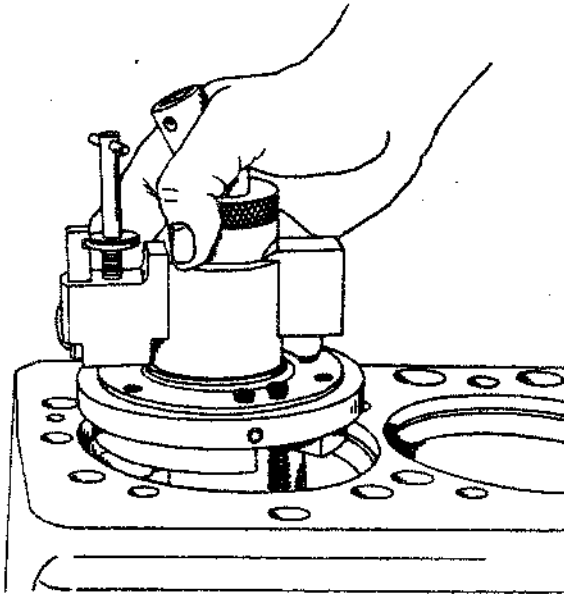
Positioning Cylinder Sleeve Reseating Tool in Cylinder Block (T-51411)
